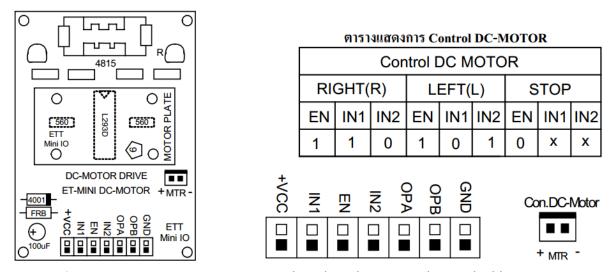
an ET-MINI DC-MOTOR circuit board, pin location and control table
